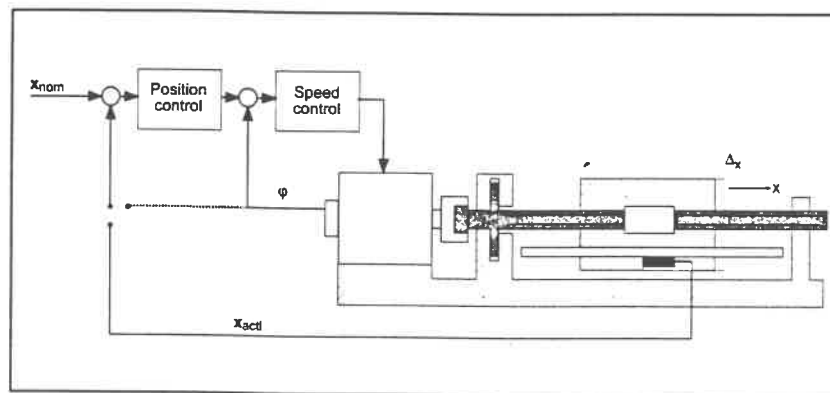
Fundamental difference between position control with linear encoder and with rotary encoder/spindle. The linear encoder includes the feed drive mechanism in the control loop.
